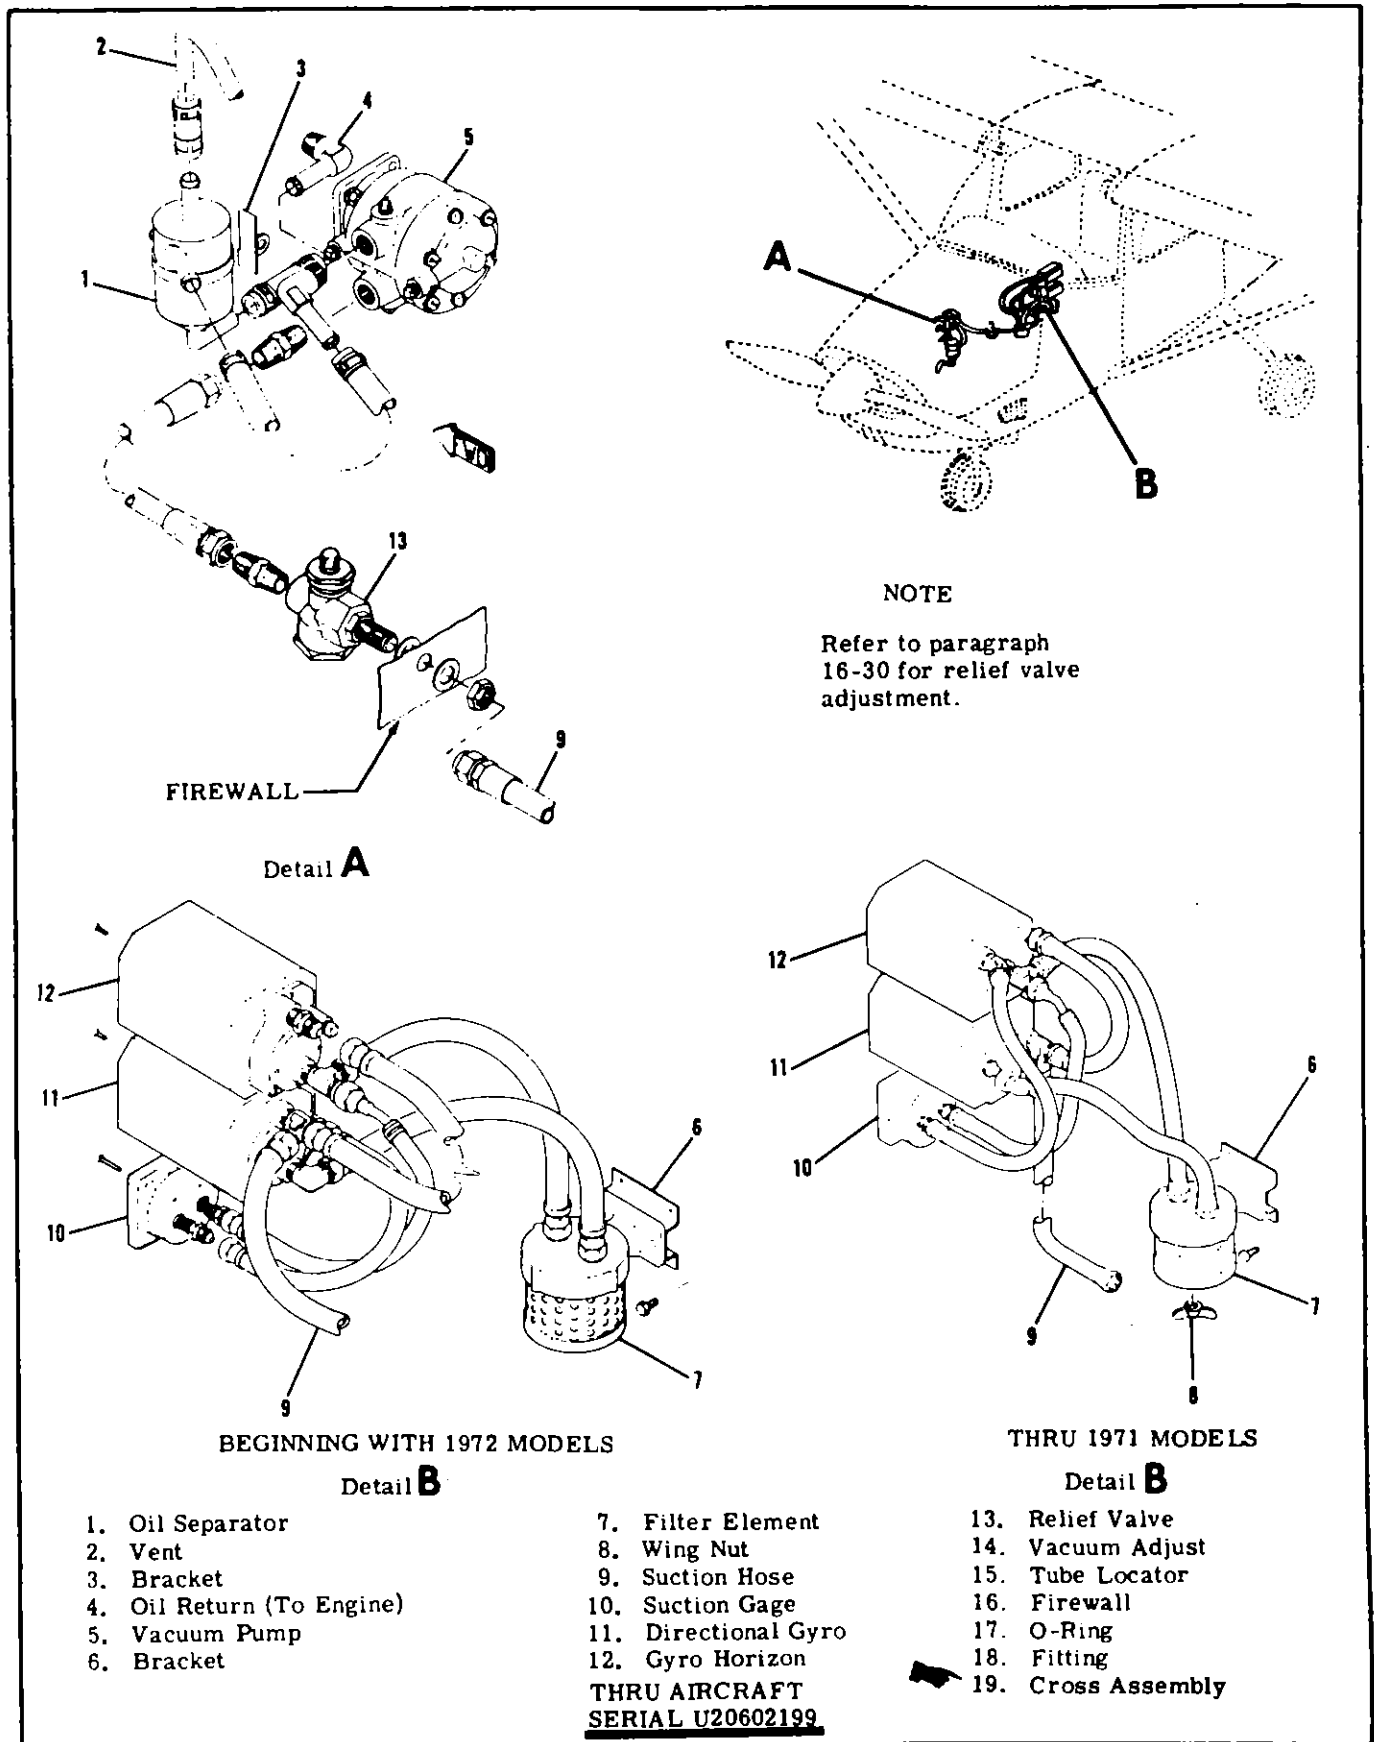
Vacuum System (Sheet 1 of 3) Wet System
